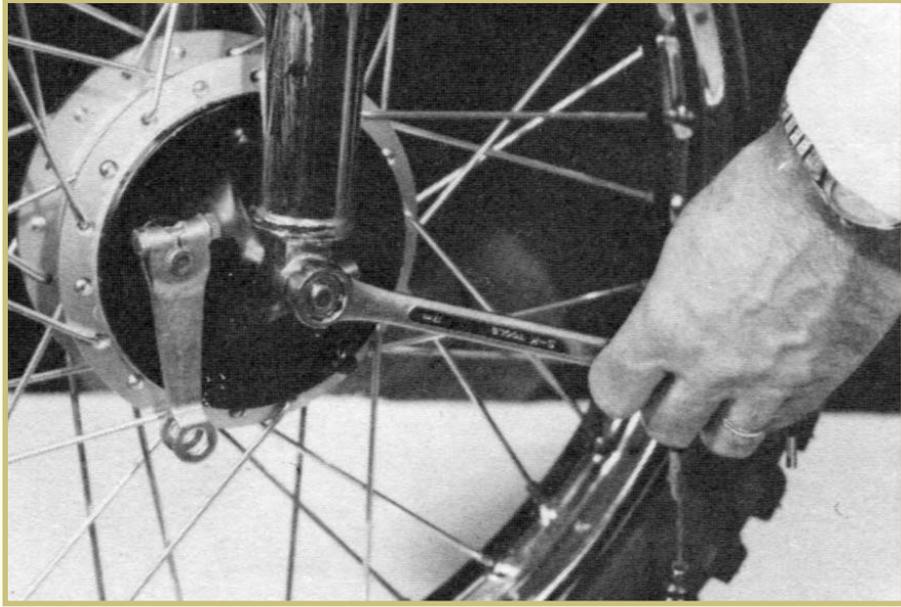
A technician is removing the fork-tube cap nut.
